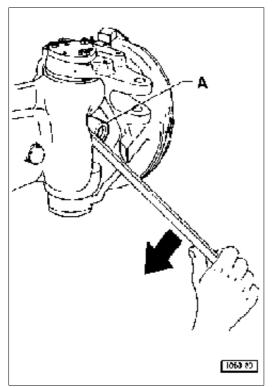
Prising with a lever to hold the axle shaft in position when mounting the final epicyclic reducer.
